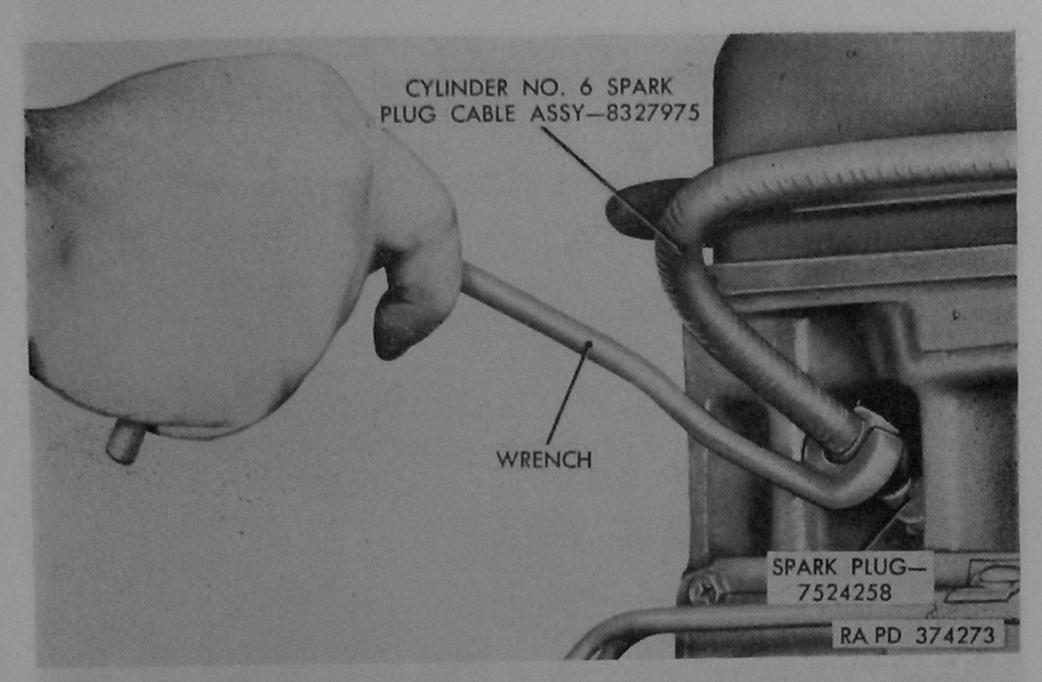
Disconnecting spark plug cable using wrench 7950895.
